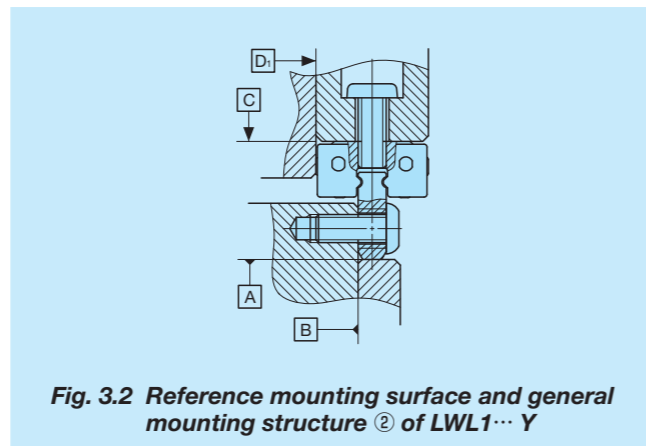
Reference mounting surface and general mounting structure ② of LWL1...Y
